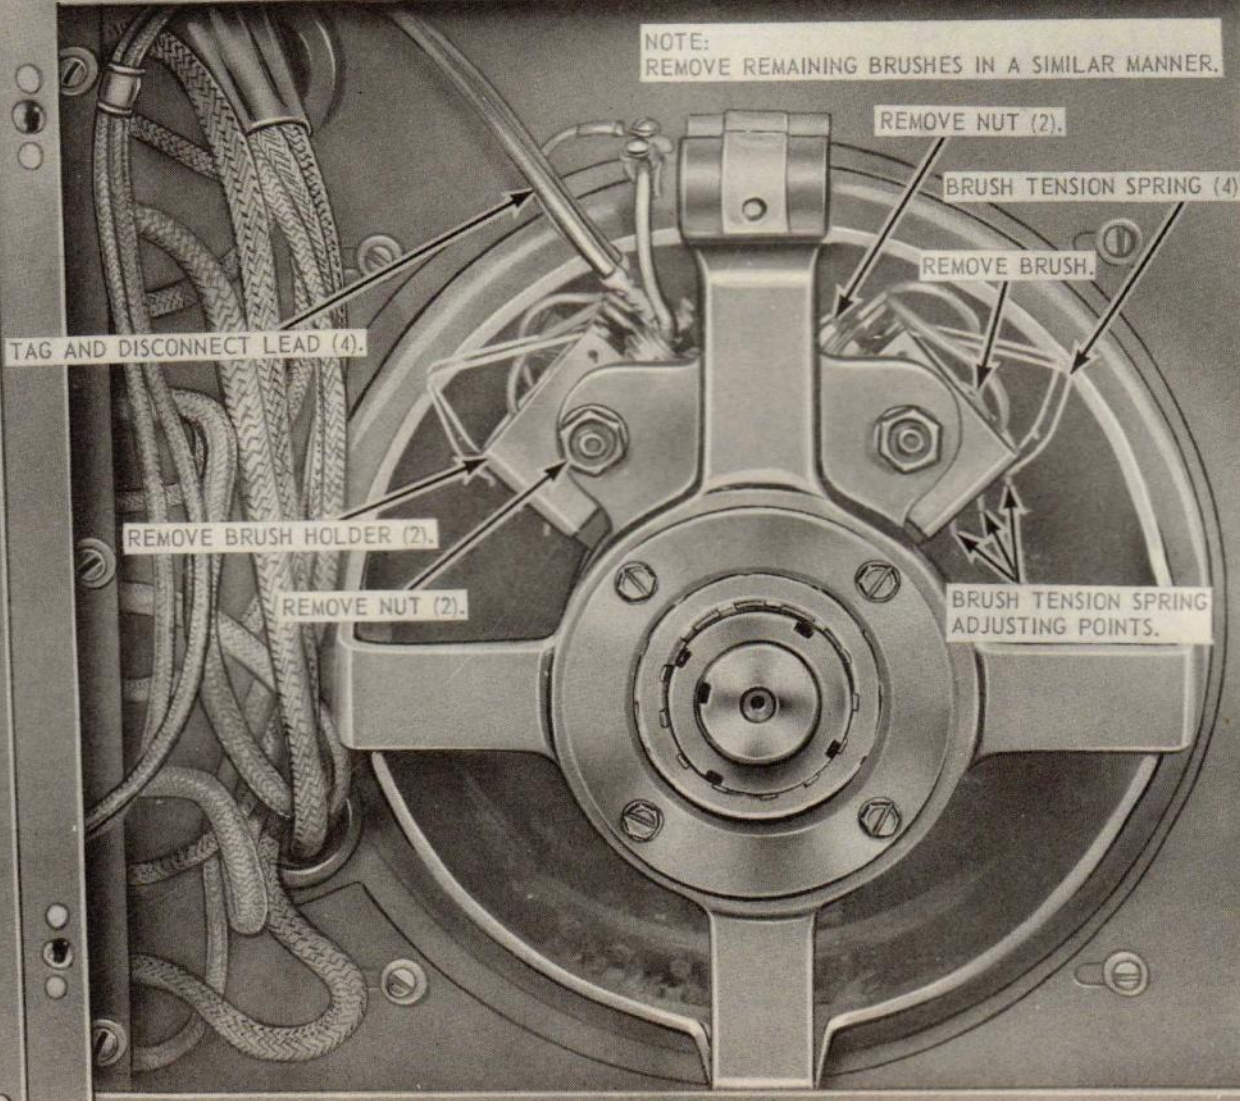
Covers and main generator brush and holder adjustment, removal and installation.
